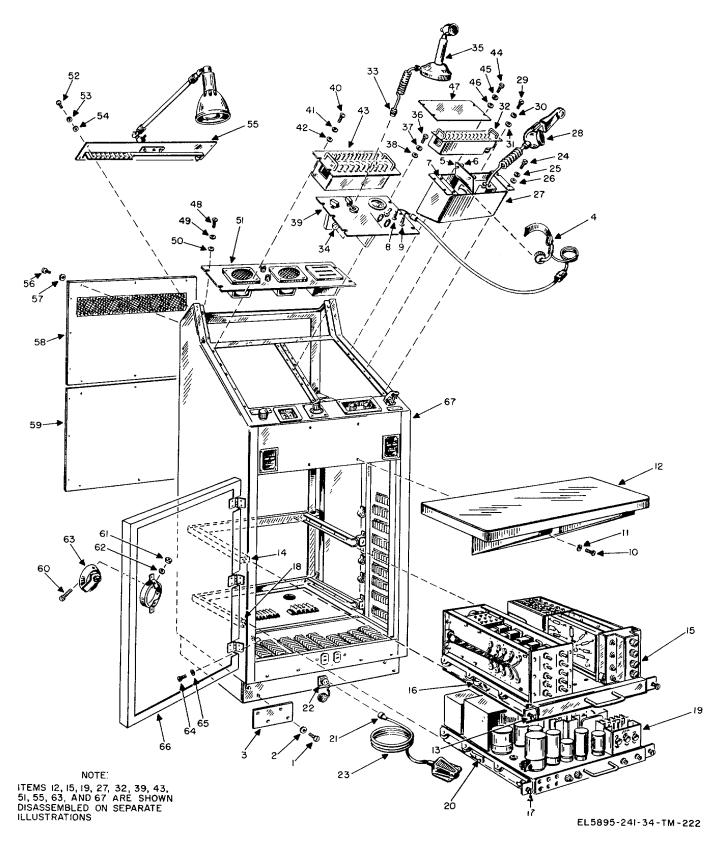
Console, Communications Control OA-2055/FSW-8, exploded view.
